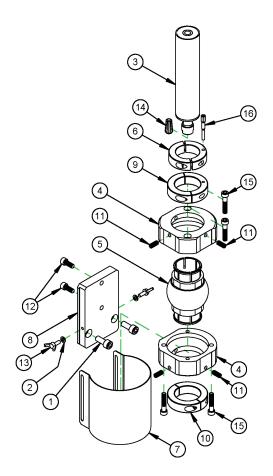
MACHINING ARM ASSEMBLY (P/N 57872)
